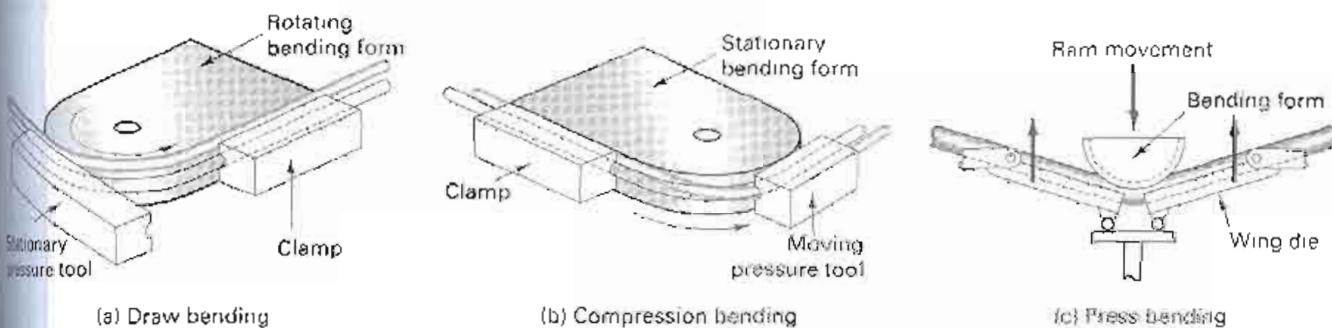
(a) Draw bending, in which the form block rotates; (b) compression bending, in which a moving tool compresses the workpiece against a stationary form; (c) press bending, where the press ram moves the bending form.
